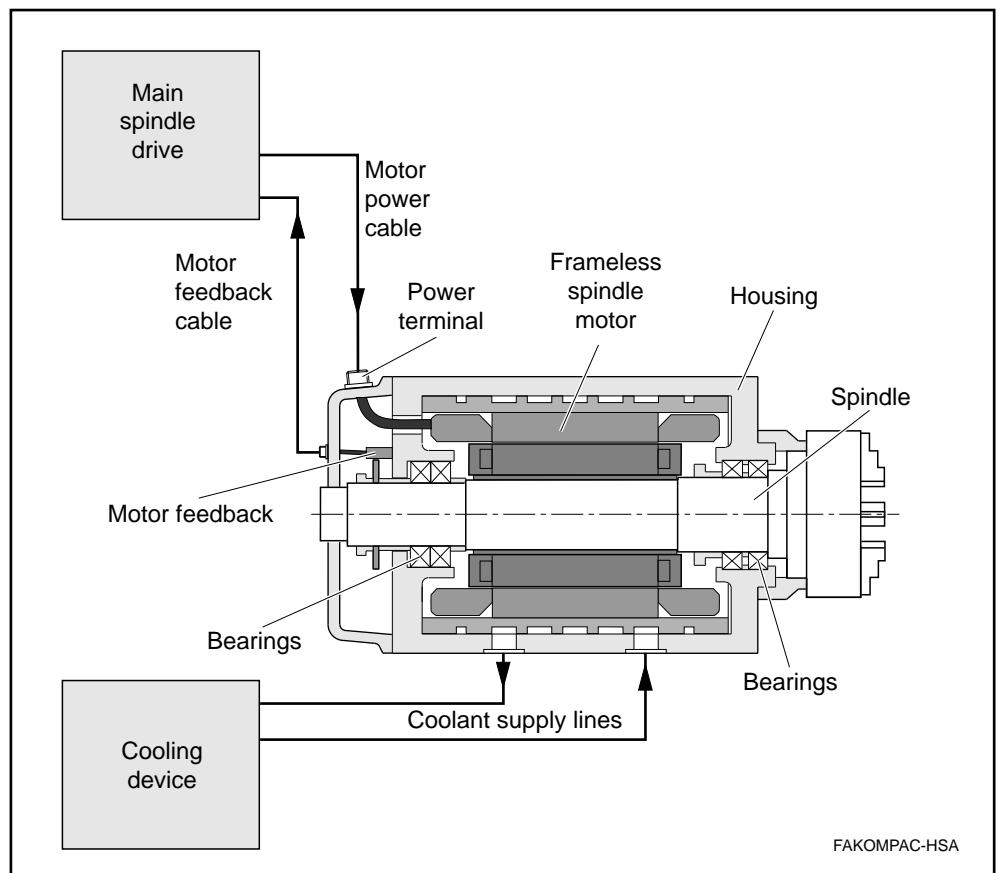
Parts of the AC main spindle drive with frameless spindle motor
